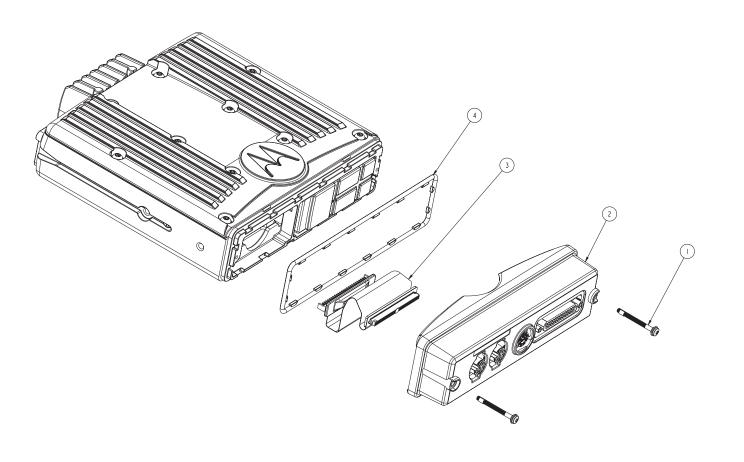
XTL 5000 O5 Mid Power Remote Mount Radio Exploded View
